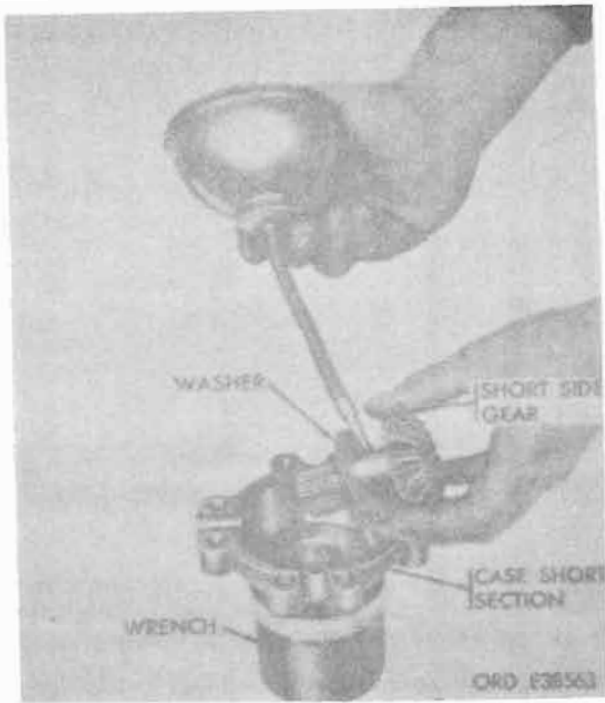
Lubricating and installing short side gear and thrust washer.
